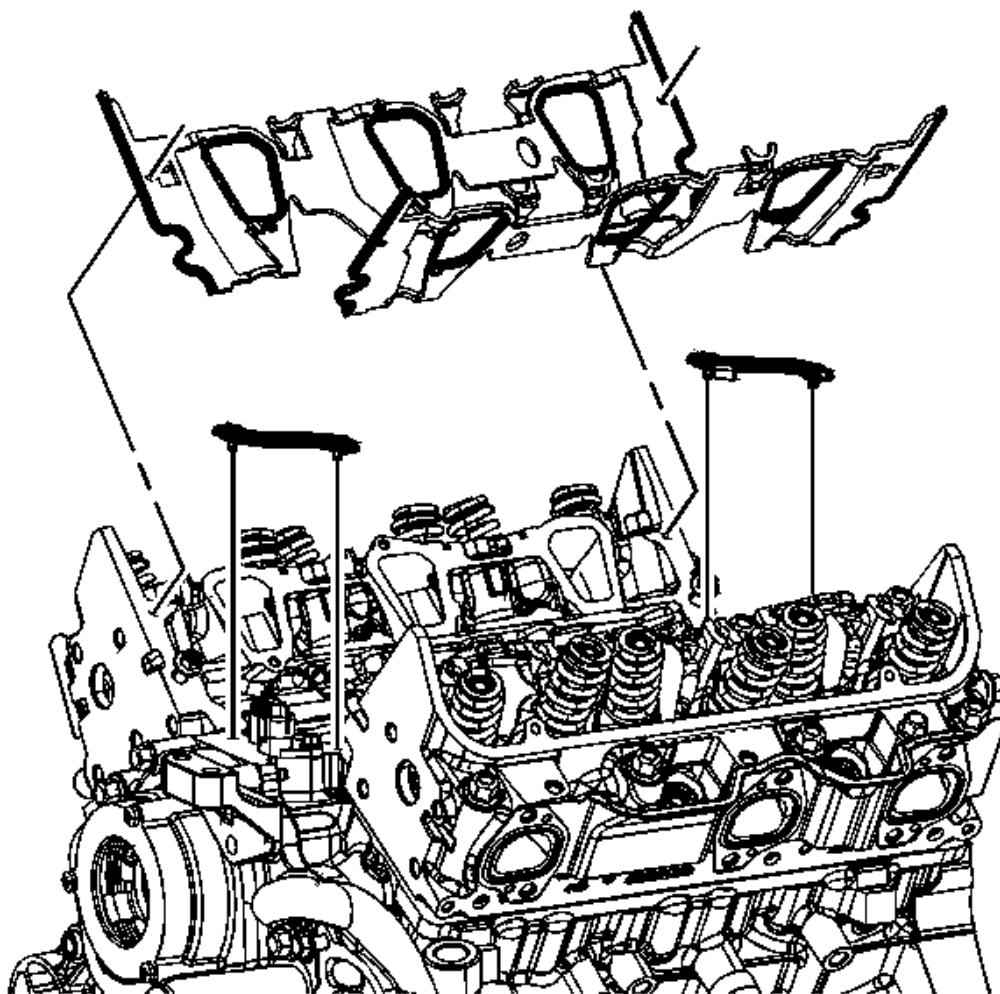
Identifying Intake Manifold Gaskets & Seals
